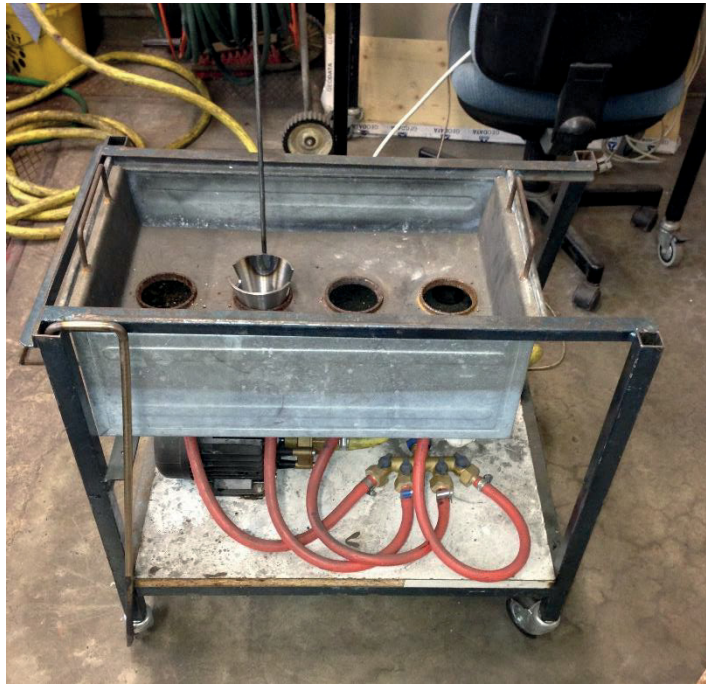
TP-1 test device with inserted TP-1 mould.
